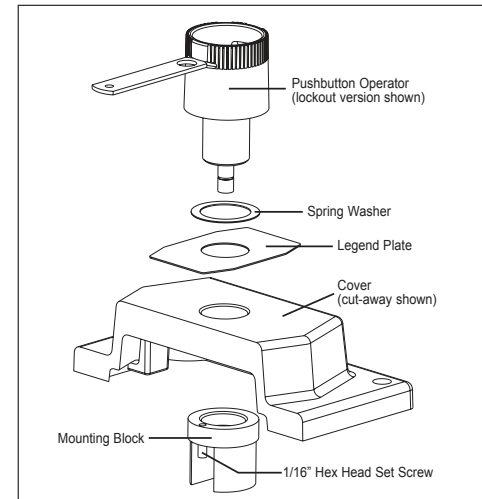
Assembly of Single Pushbutton Operator with One Contact Block
